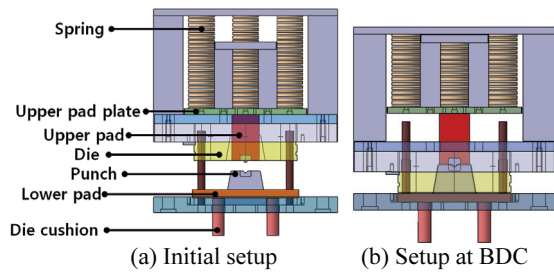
Schematic shape of the tools for the forming of the hat-type product
